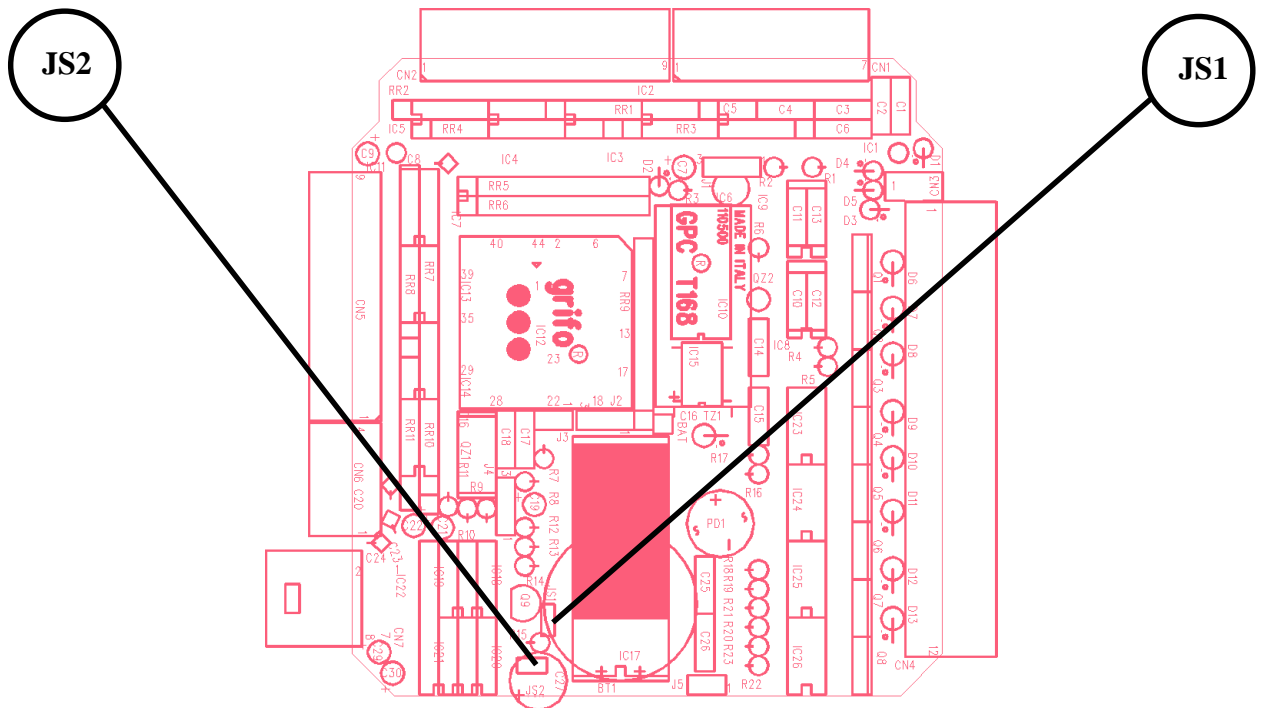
GPC® T168 JUMPERS LOCATION ON SOLDER SIDE
